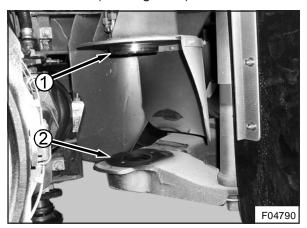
Top mounting plate (1) and C-beam mounting surface (2) - (tag axle side)
